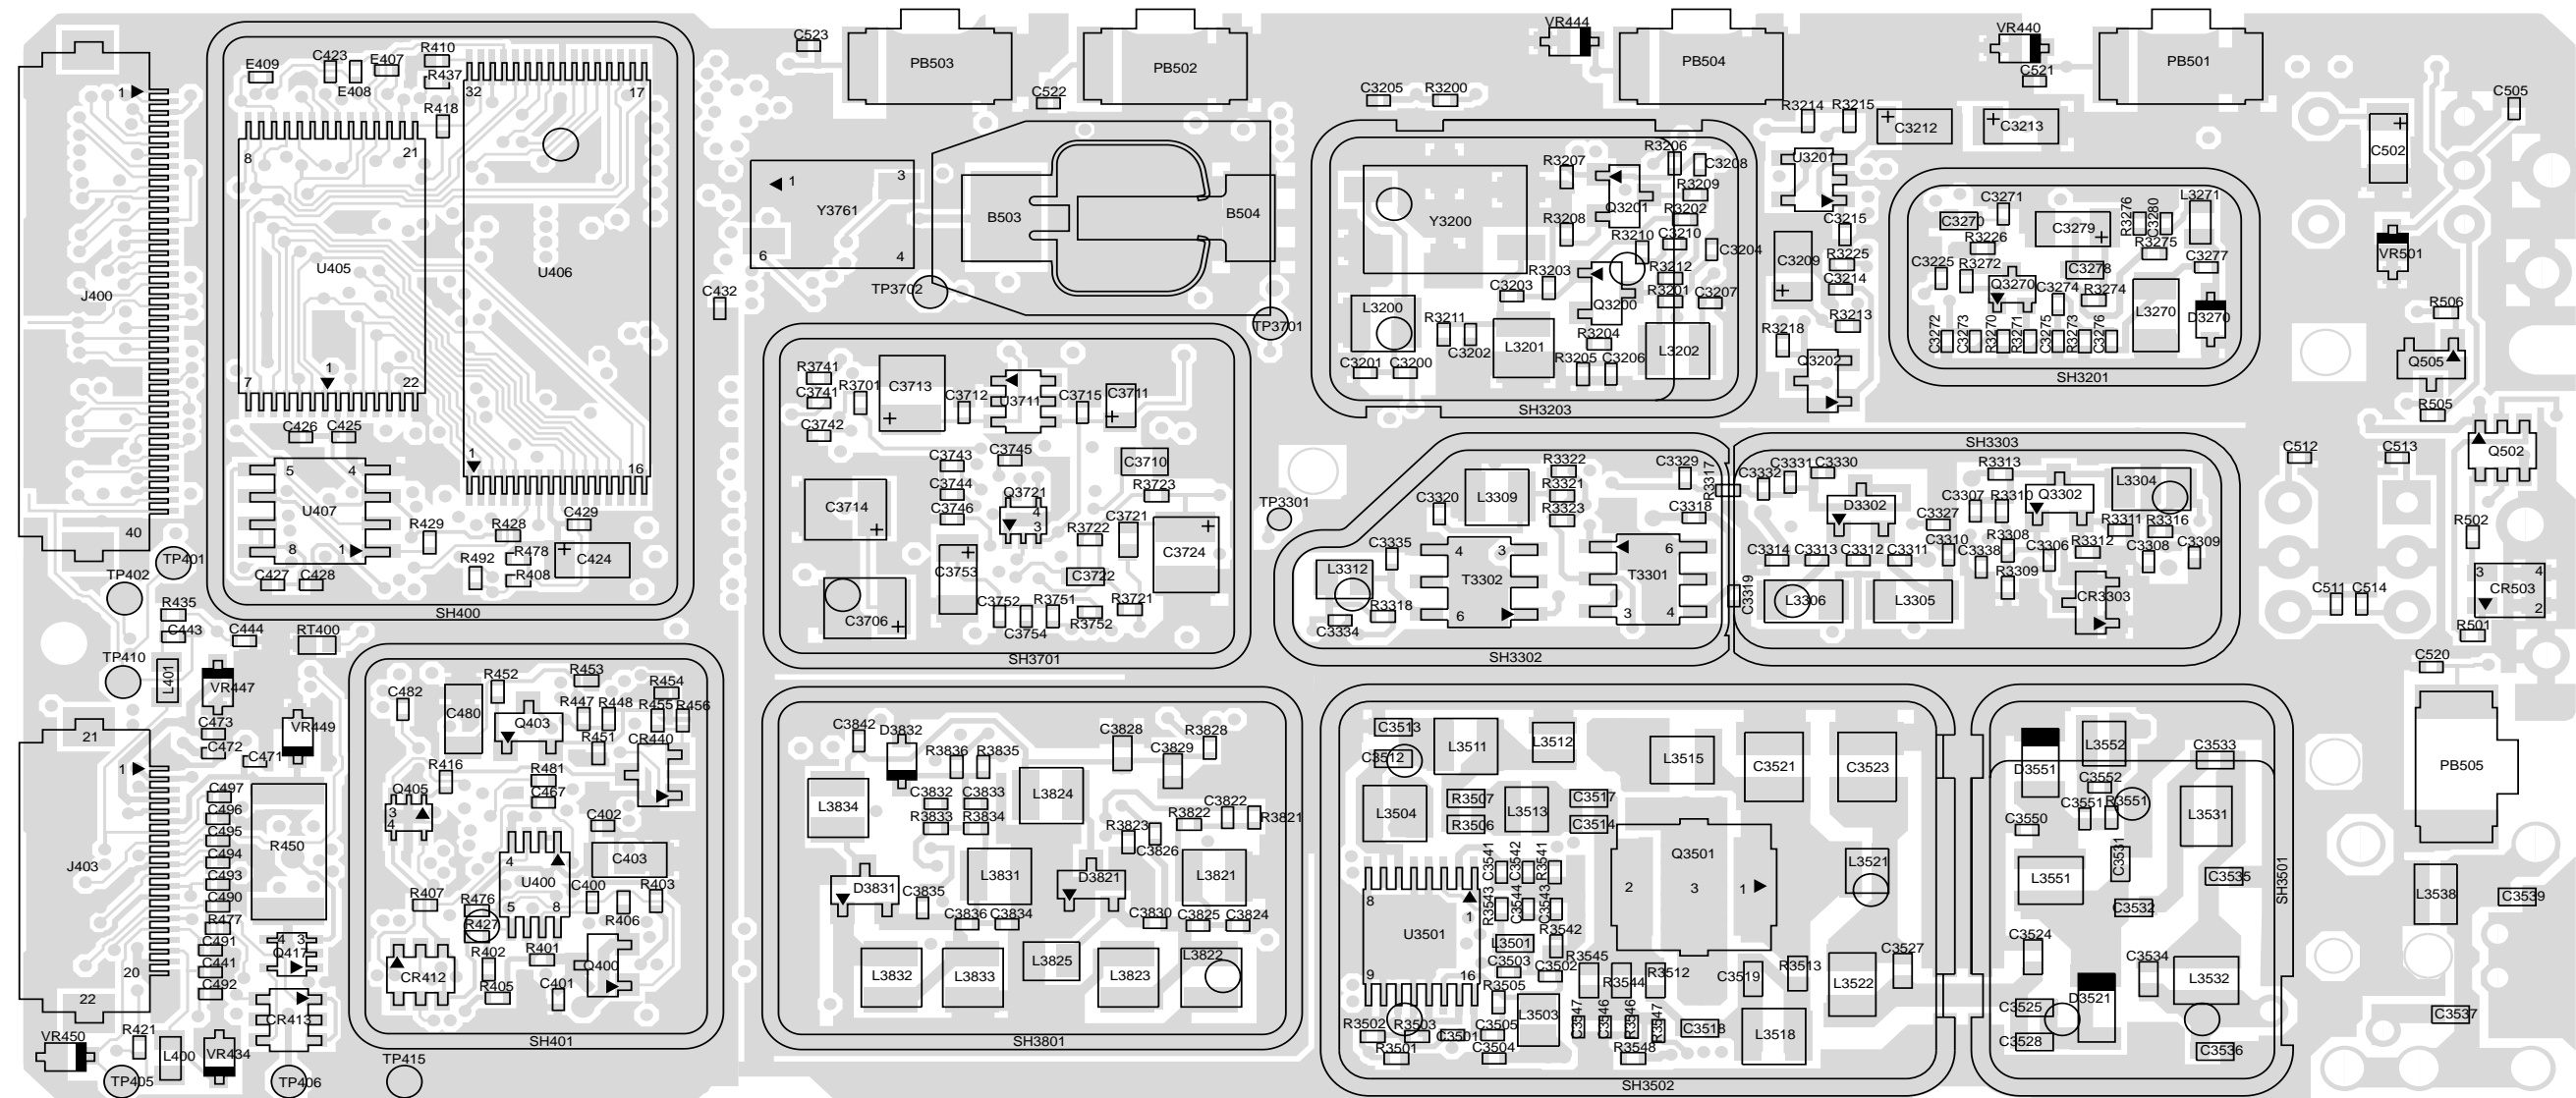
VHF (136-174 MHz) 5000/7000 Series Main Board Top Side PCB 8486062B16
